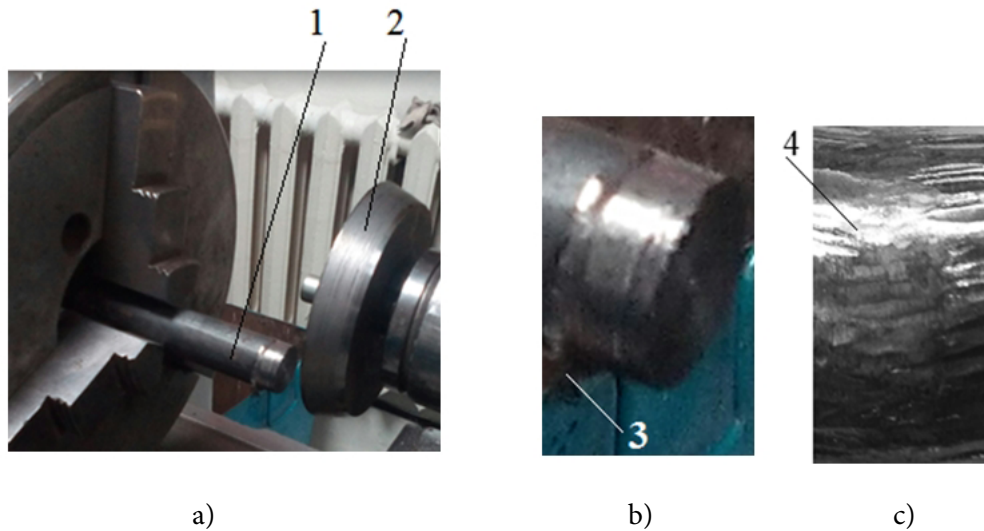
The processing of steel 30KhGSA in case simultaneous rotation of workpiece and tool
